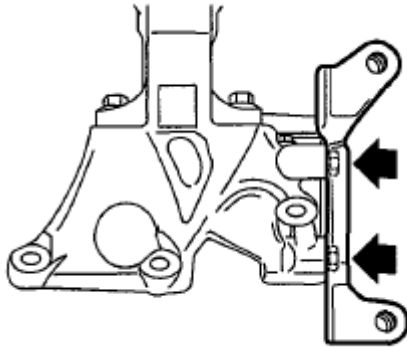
Locating Turbocharger Upper Stay Clamping Bolts
